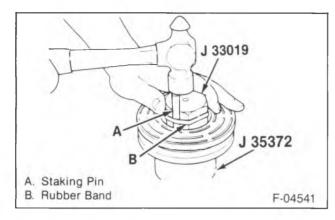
Staking the Pulley Bearing in the Pulley Bore
